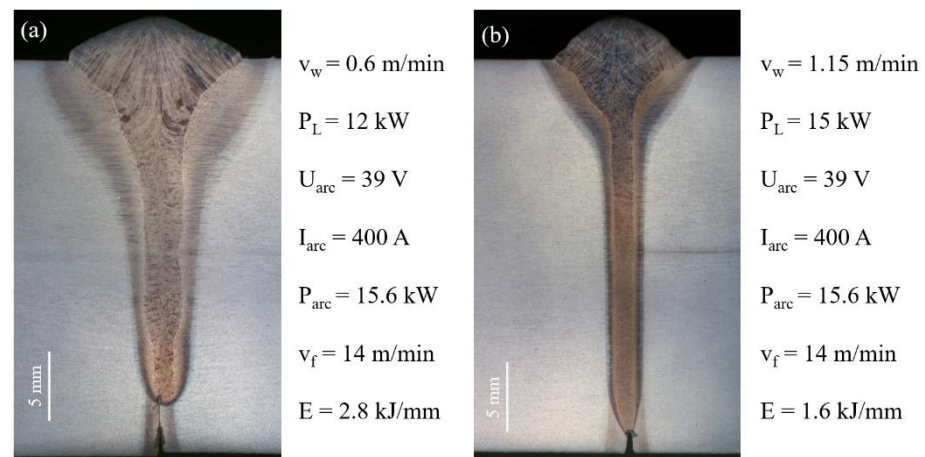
Cross-sections of partial penetration HLAW seams performed with different process parameters: (a) lower welding speed und laser power; (b) higher welding speed und laser power.
